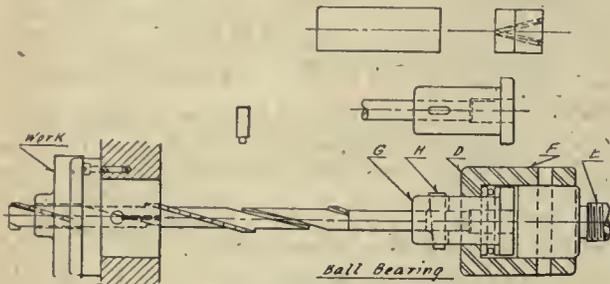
METHOD OF SPIRAL BROACHING WHERE BROACH REVOLVES.
